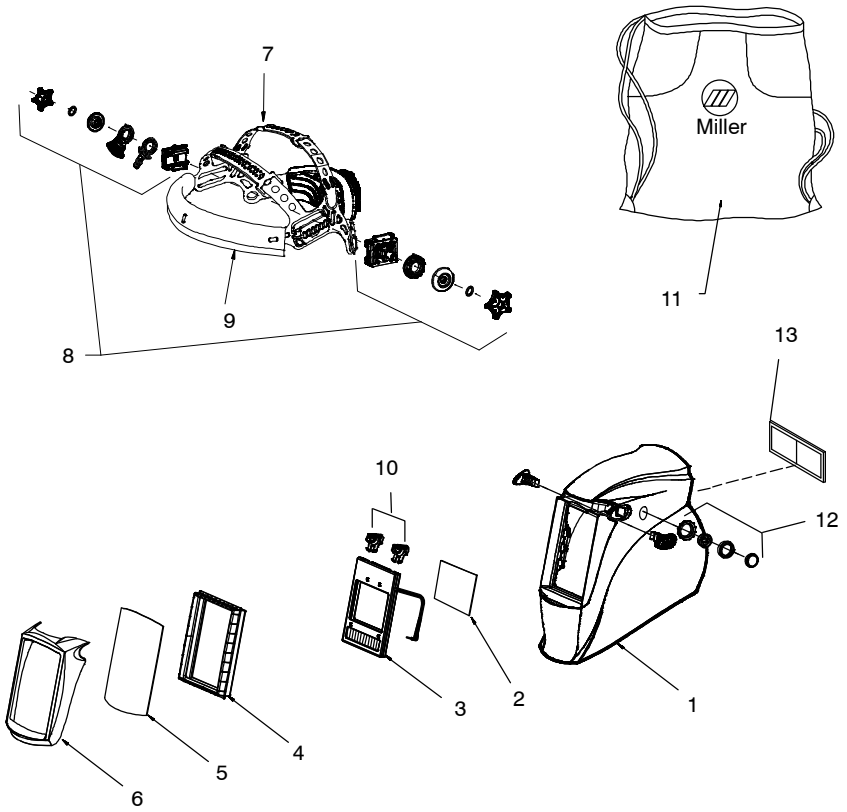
Titanium 9400 Auto-Darkening Welding Helmet
